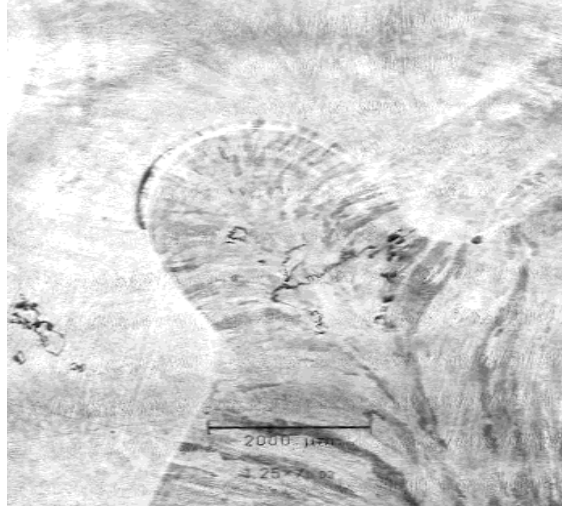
Weld metal cracking in weld W352 fabricated with a MIL-120S electrode.
